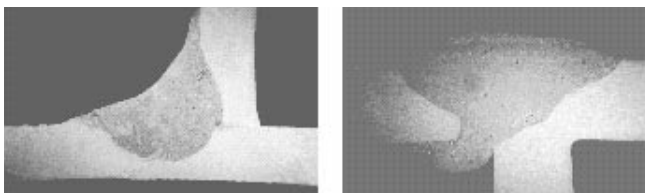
Typical cross-sections of a horizontal fillet weld and a flat butt joint.
